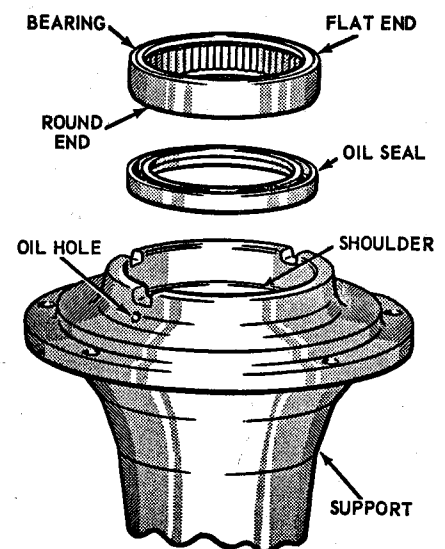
View showing proper installation of oil seal and needle roller bearing in clutch release bearing support. If bearing is driven in too far on splash lubricated transmissions, it will close off oil hole in support.
